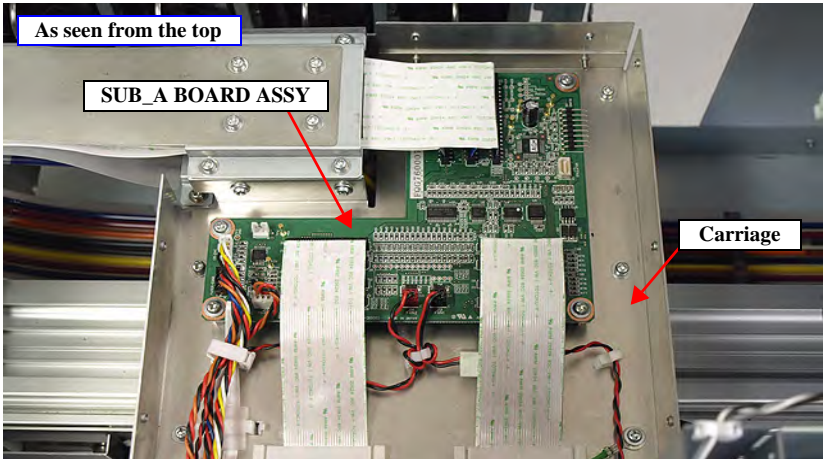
Disconnecting the cables on the SUB_A BOARD ASSY
